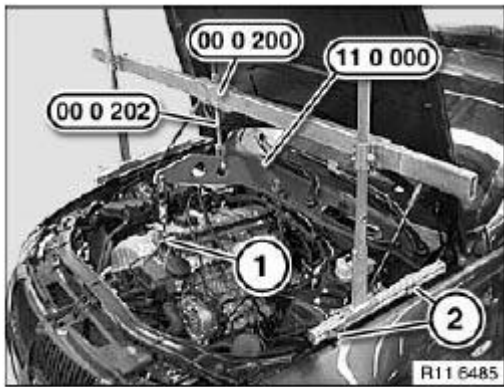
Identifying Towing Hook, Supports With Special Tools
